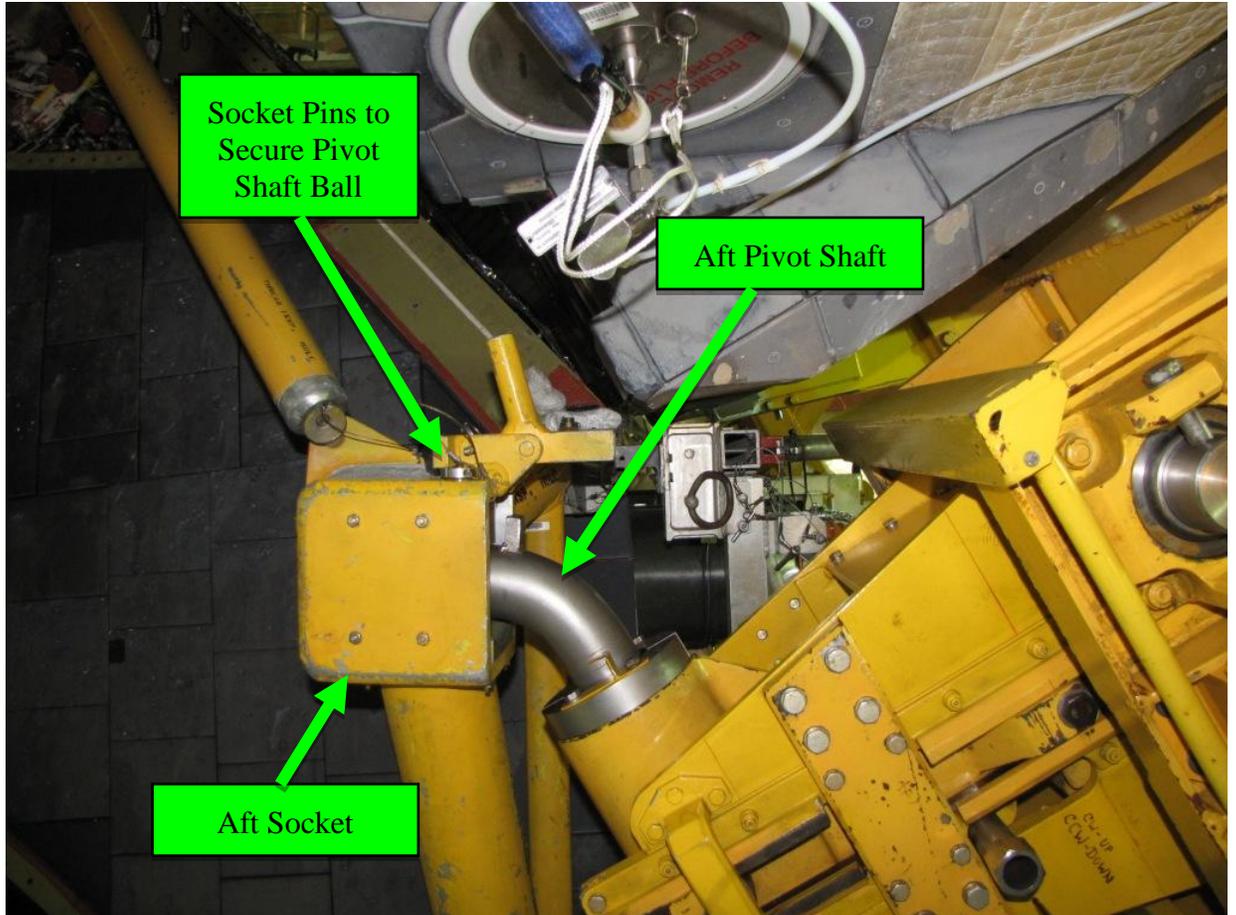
Aft Pivot Shaft Pinned to the Orbiter Mounted Aft Socket
